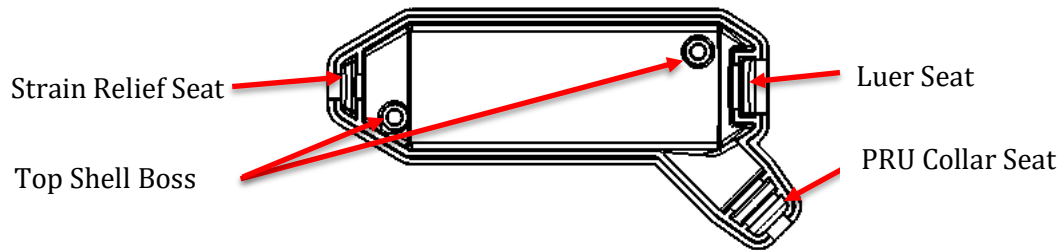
Epoxy adhesive application layout for Housing, Bridgeboard, Top Shell
